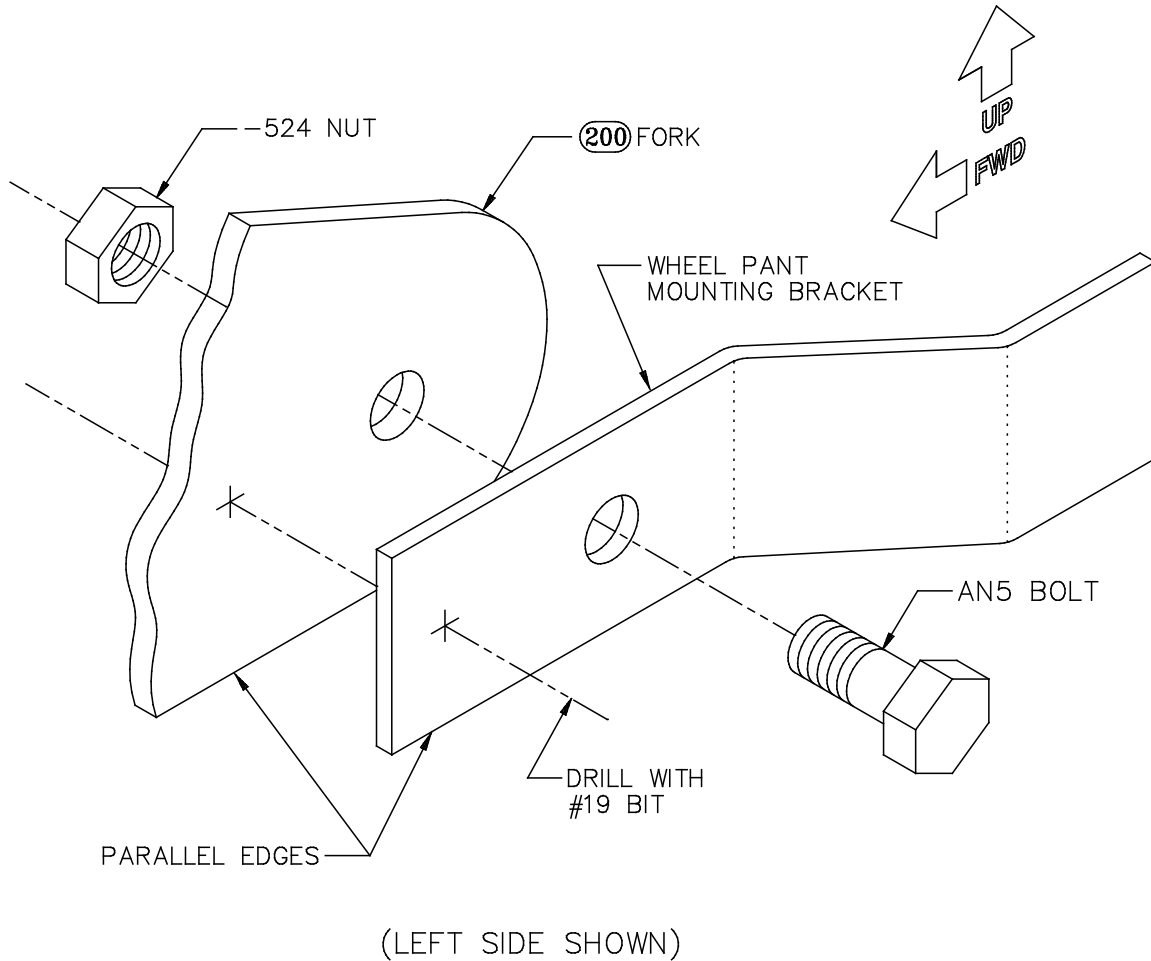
Positioning and Drilling the Aft Wheel Pant Mounting Bracket
